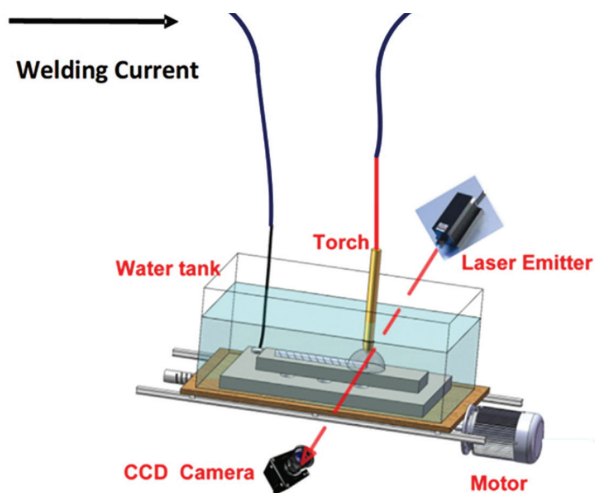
Underwater welding laser backlighting system used in Ref. 53.
